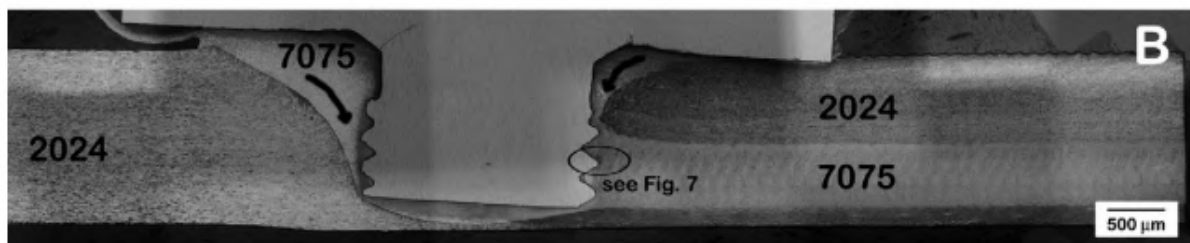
Macrograph image of a prematurely stopped dissimilar AA2024/AA7075 weld showing the aluminium flux in the welded joint by Silva et al. [77].
